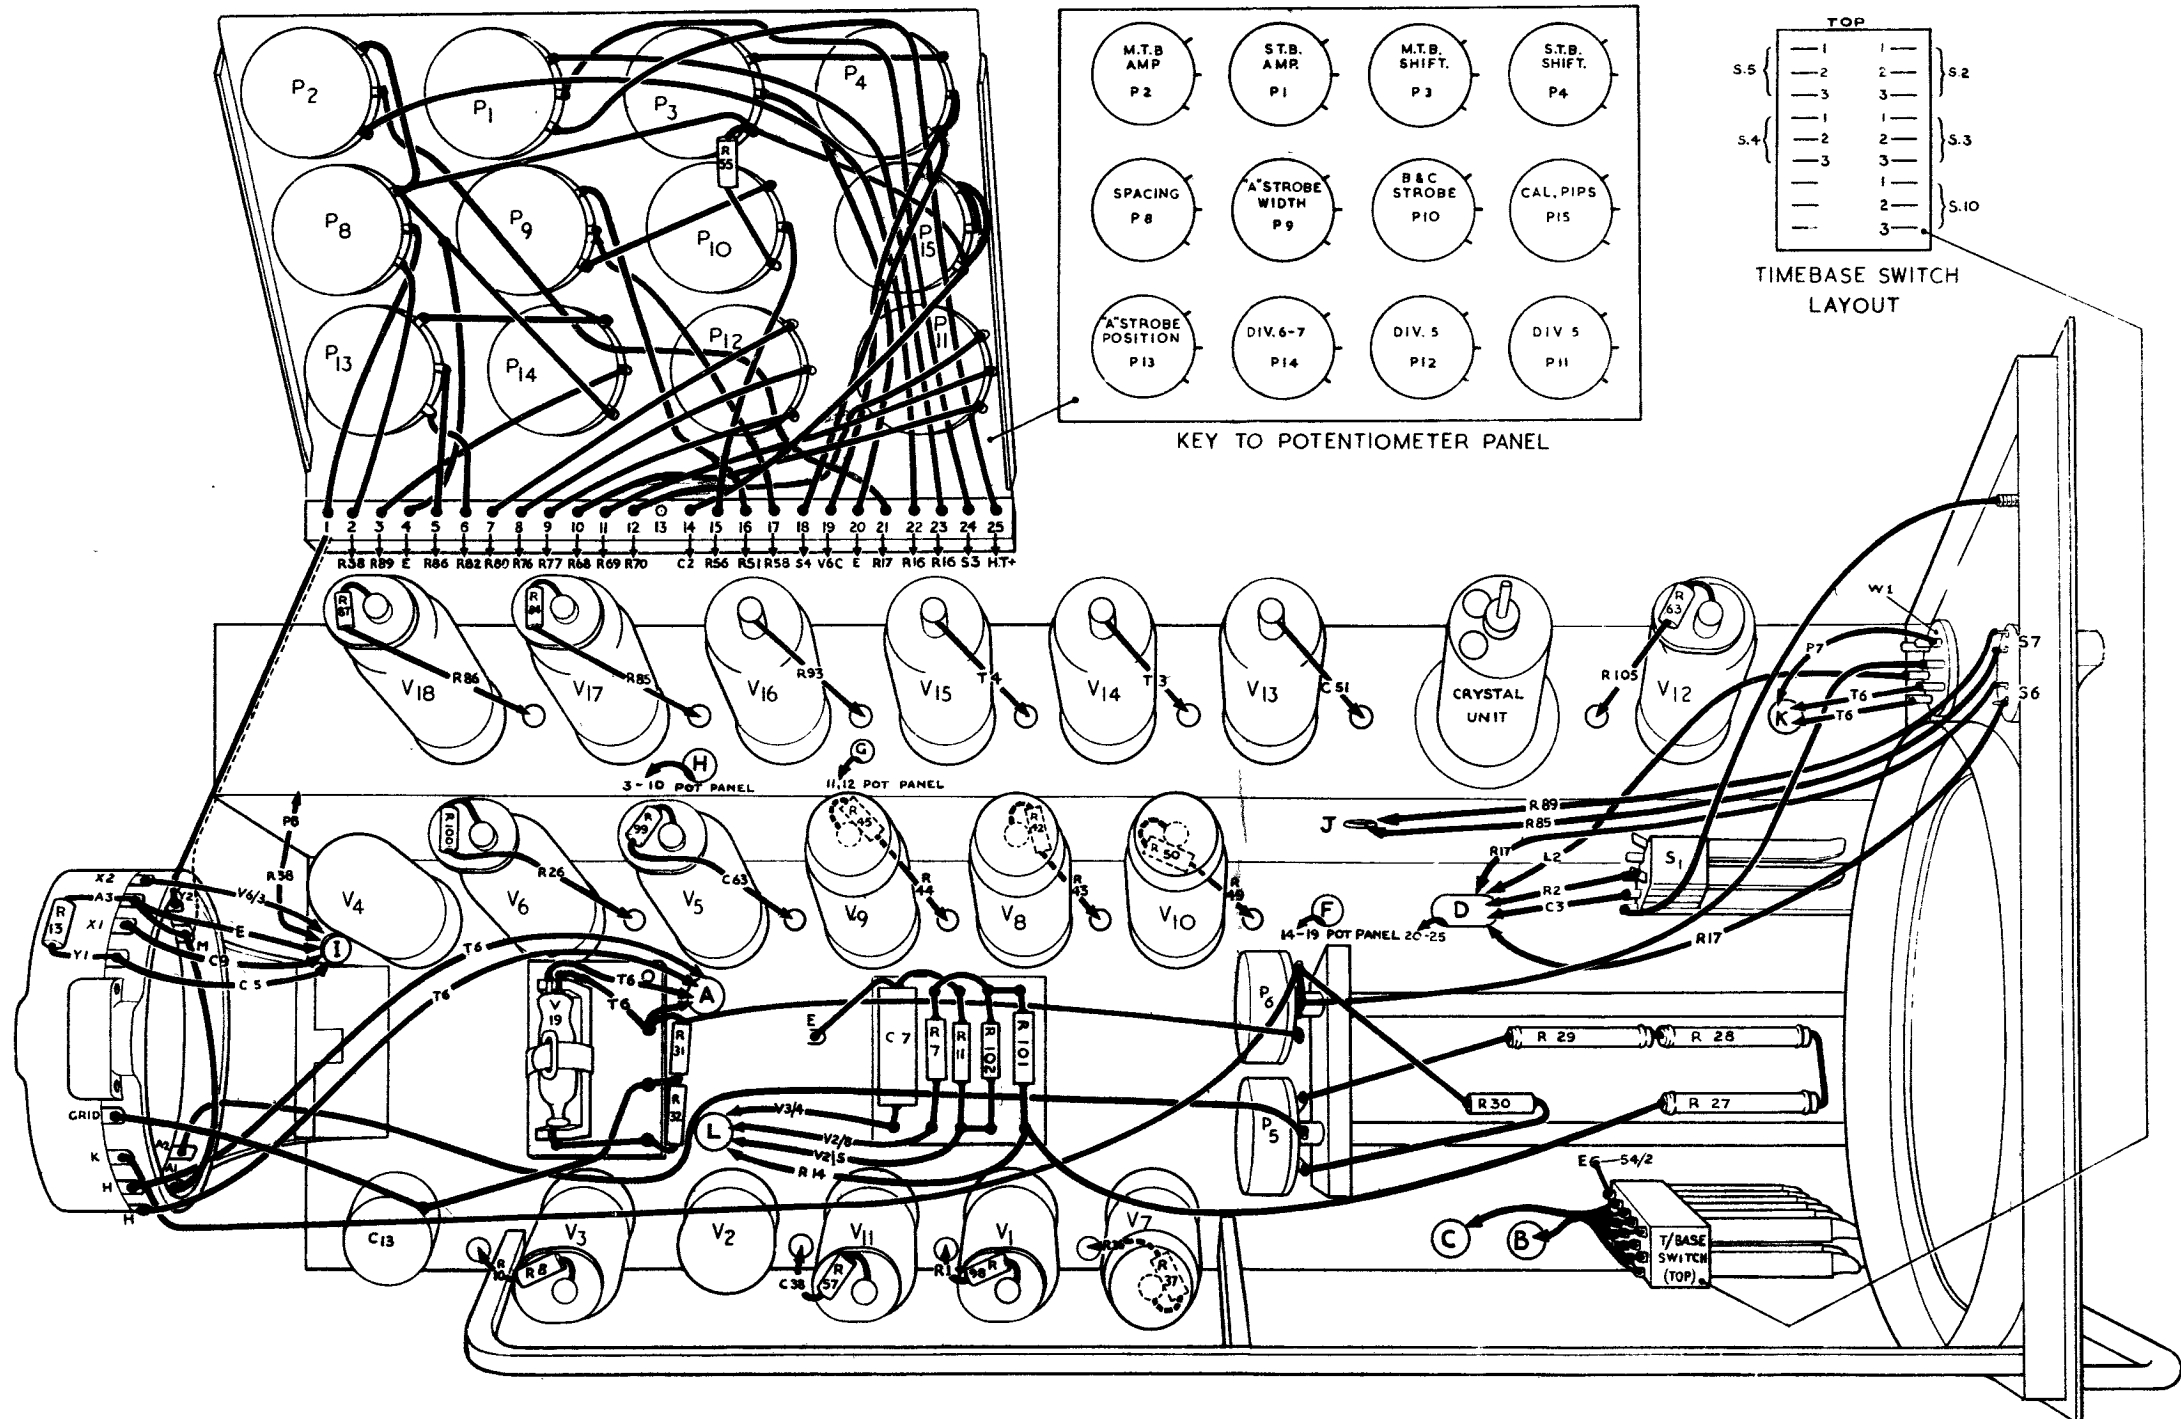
BENCH WIRING OF INDICATING UNIT TYPE 62 - TOP OF CHASSIS
